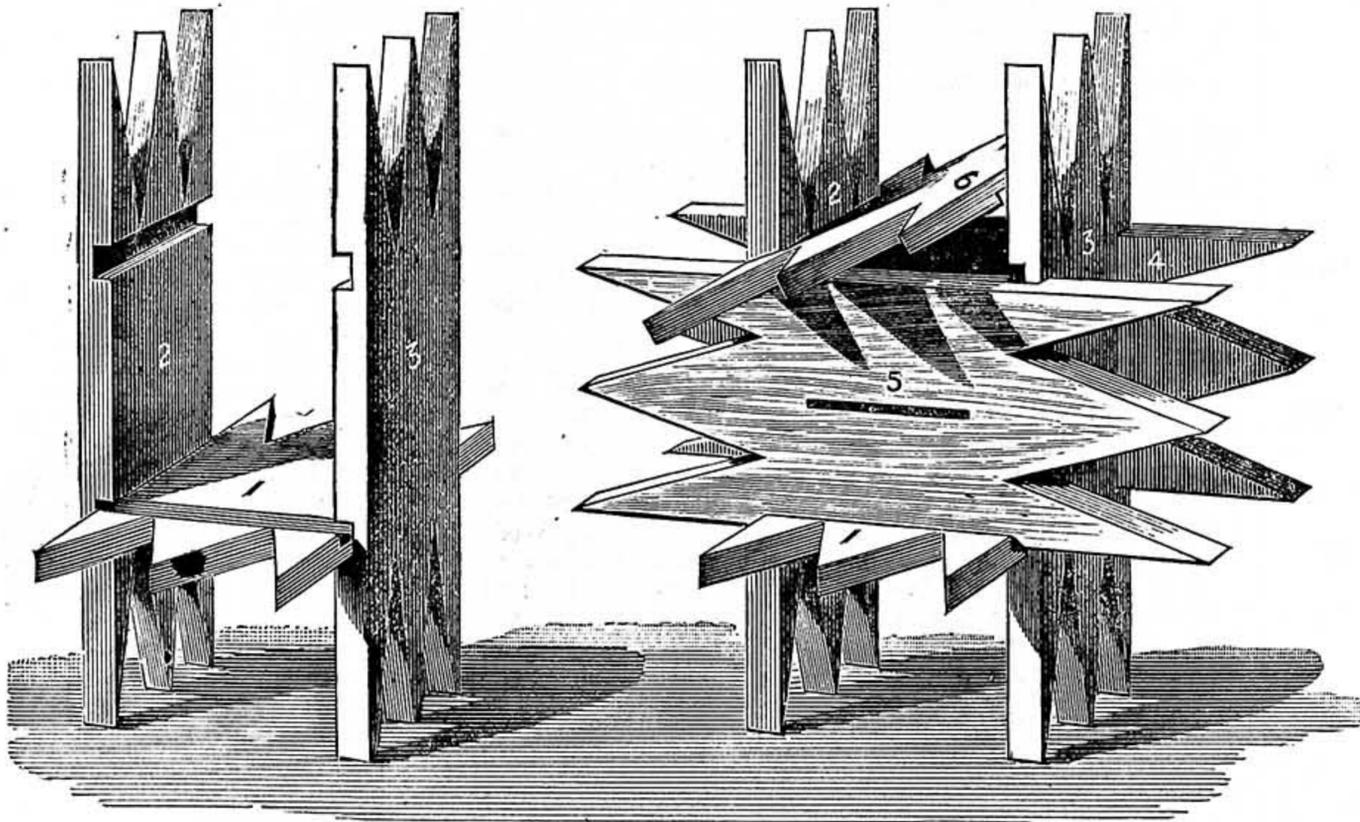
Commencement of putting Parts together. Fig. 3.—Completion of putting Parts together.
